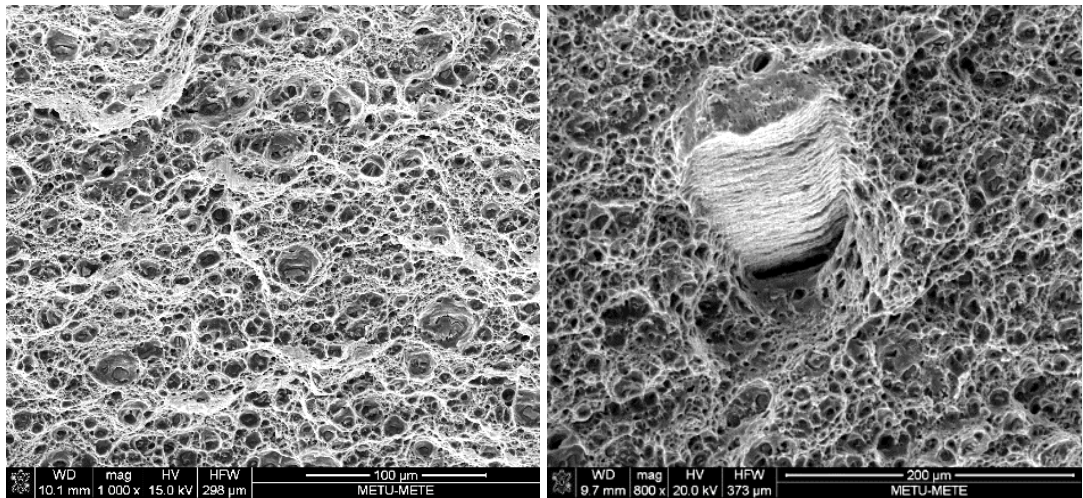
Fracture surfaces of the FSPed weldment (tensile test)
